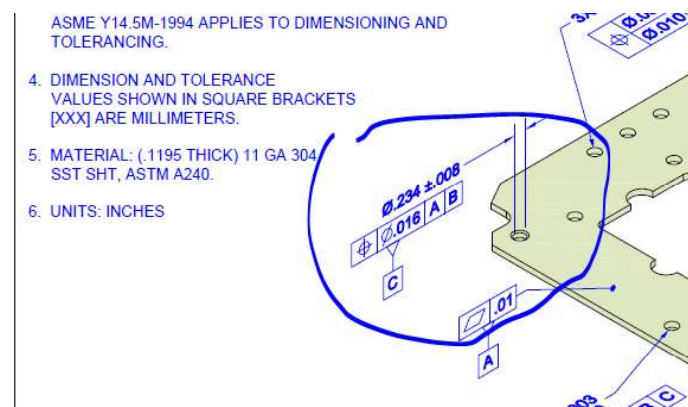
NIST Test Case FTC09, View A, Detail of Hole
